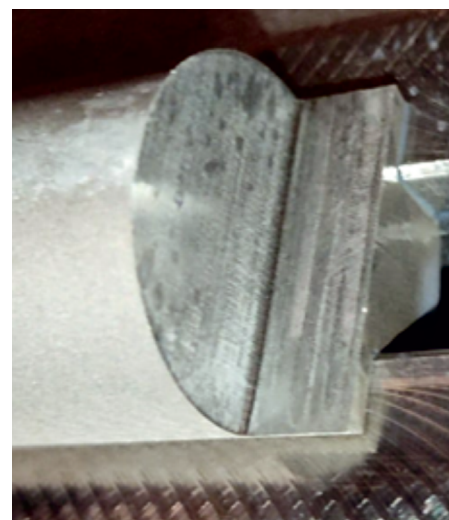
Sample surface after machining with *CNCINS MS15.Z5.08.19.63.38.R05
